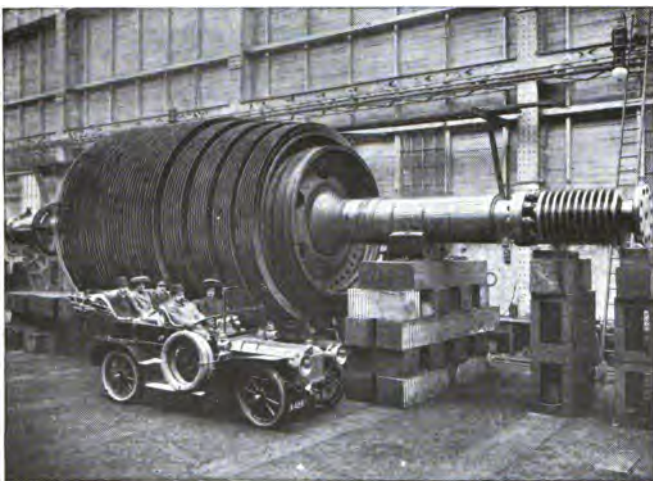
Low-pressure turbine rotor, fully bladed.
